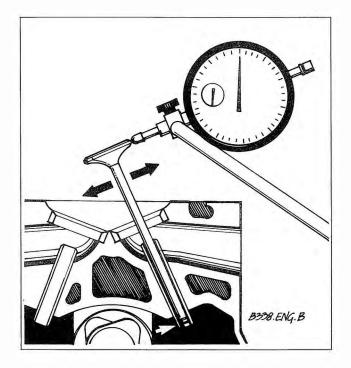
Valve guide wear being checked with dial indicator. Insert new valve until stem end is flush with end of guide (white arrow). Play should not exceed 0.8 mm (0.031 in.).
